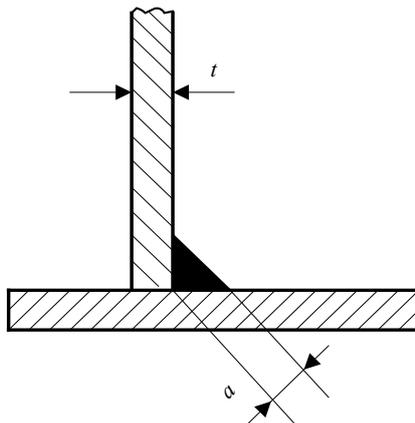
Thickness of weld a
